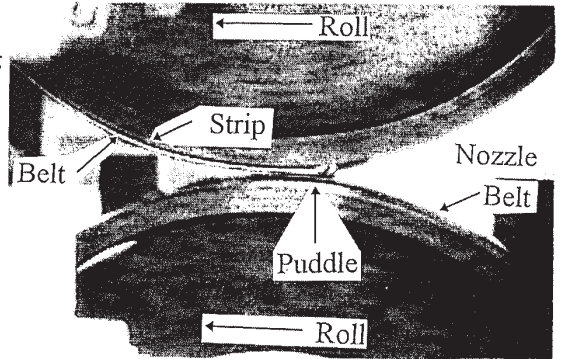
Casting of the strip by downward melt drag roll-belt caster.
